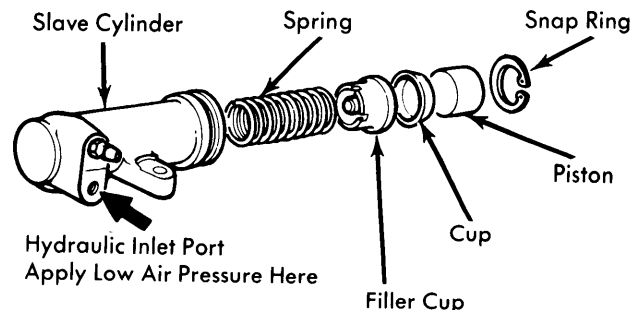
Exploded View of Clutch Slave Cylinder Assembly
